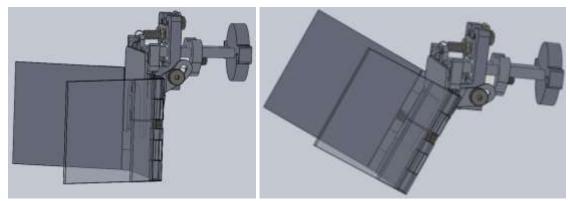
Updated clamp design; (left) pan configuration with 90° angle; (right) bowl configuration with 115° angle
